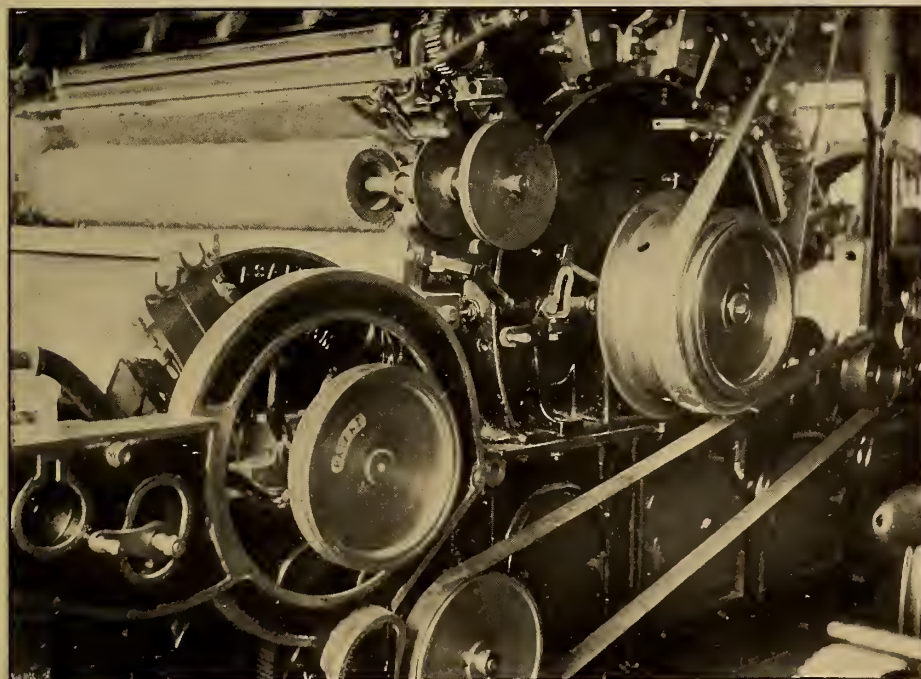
LOCKING ARRANGEMENTS ON A CARDING MACHINE WITH STRIPPING BRUSH IN POSITION
